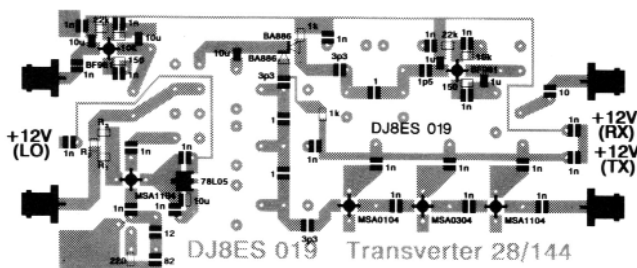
Component layout for the 2m transverter showing the track side of the PCB and the positions of the SMD components
